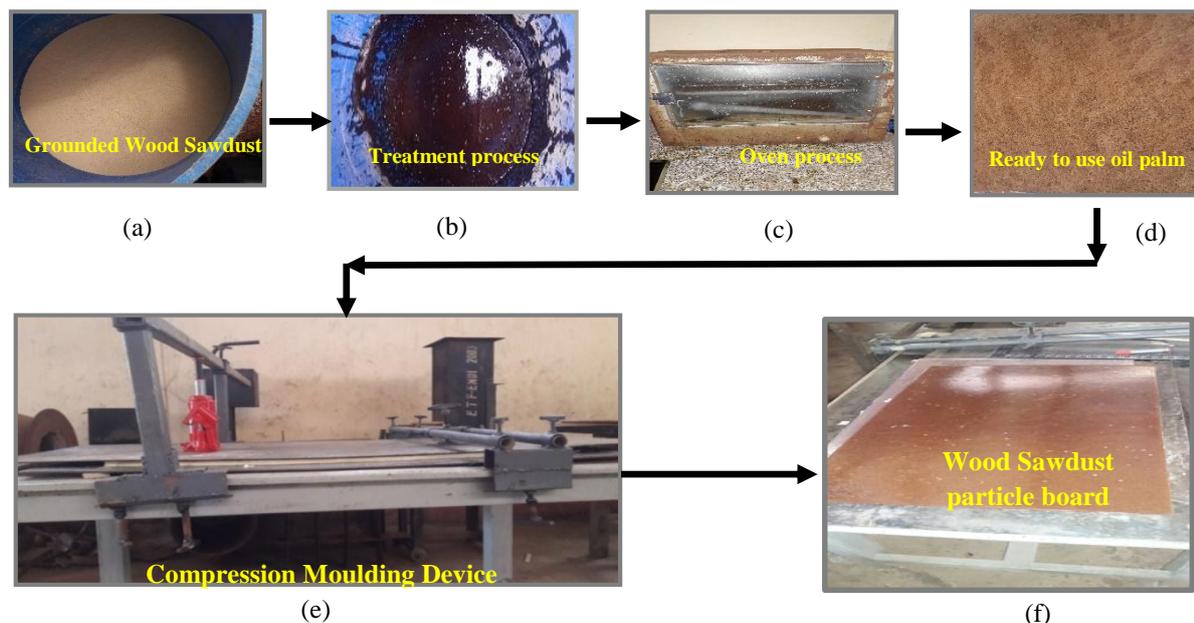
Fabrication process of the wood sawdust composite particleboard using hand Lay-up Compression Moulding
